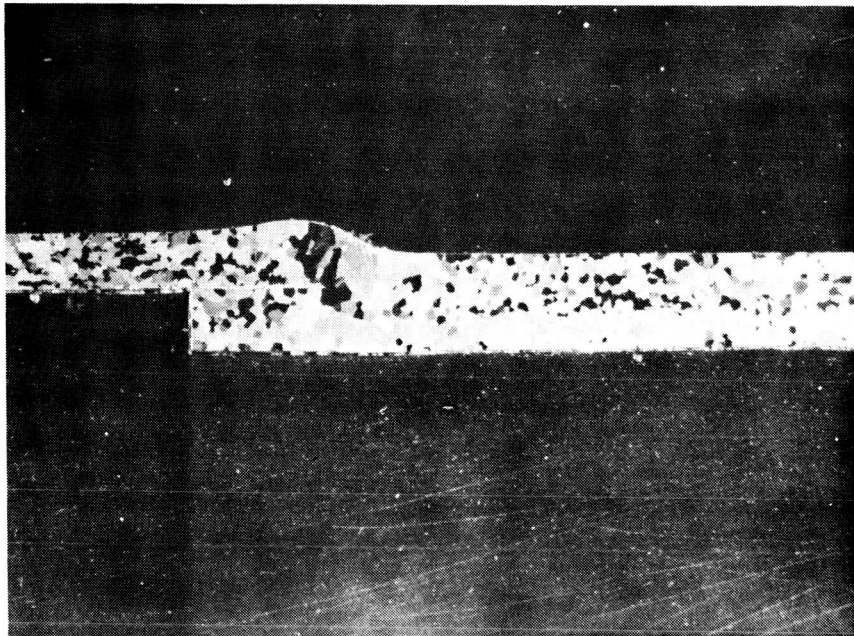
Photomicrograph of electron beam weld — 98% tungsten-2% molybdenum sleeve to tungsten tube (20x).
